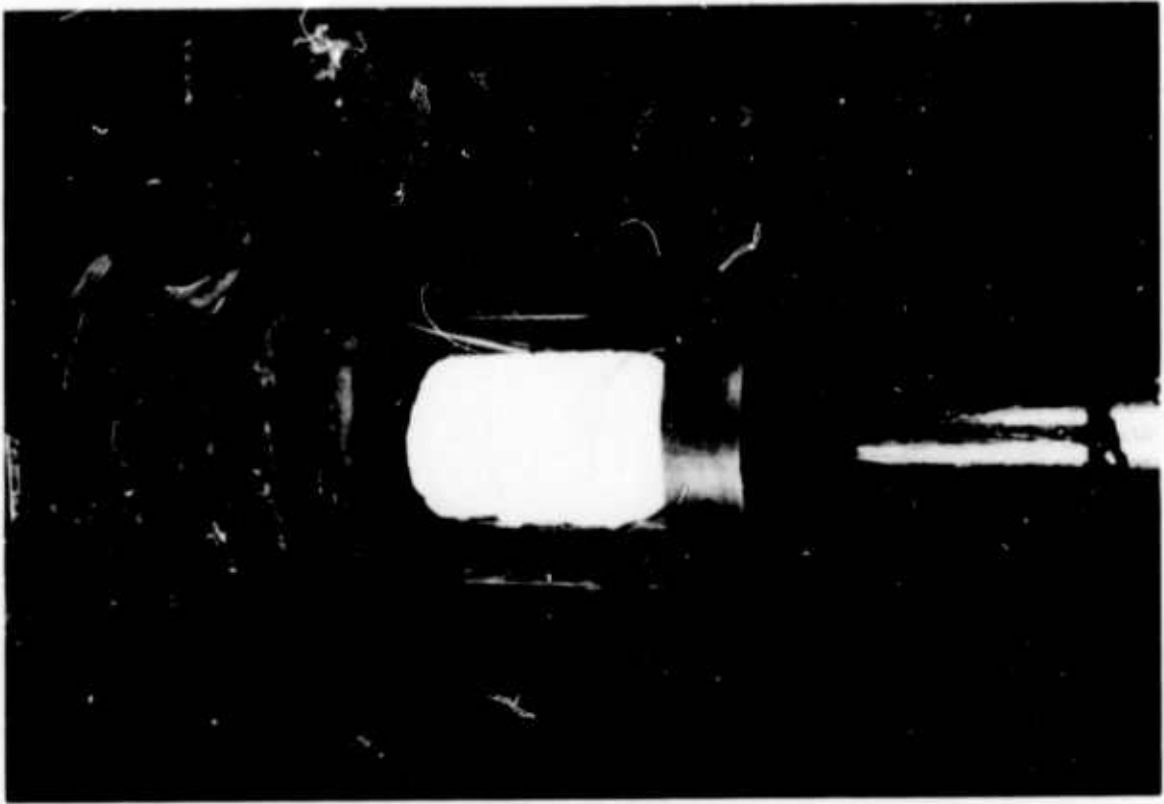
Reheated copper Alloy 905 charge just prior to injection and casting.
